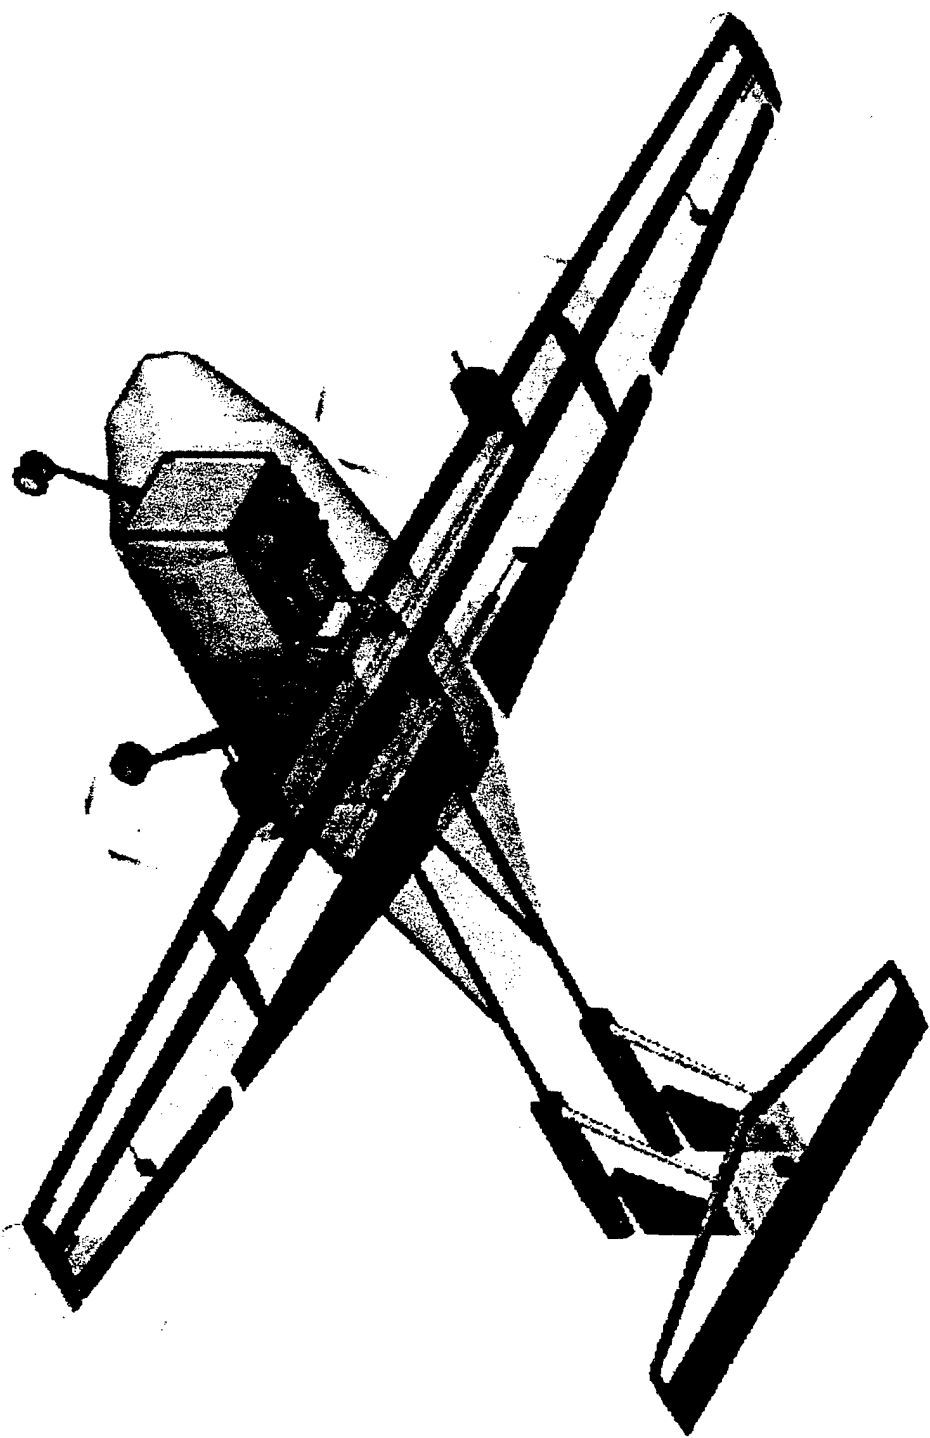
Detailed 3D Drawing of the Aircraft
